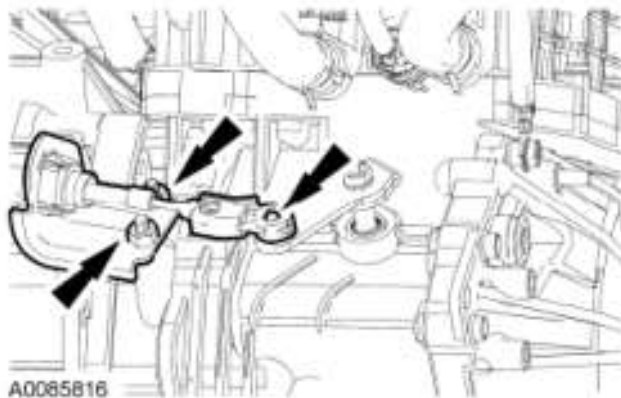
Identifying Selector Lever Cable Bracket And Nuts
